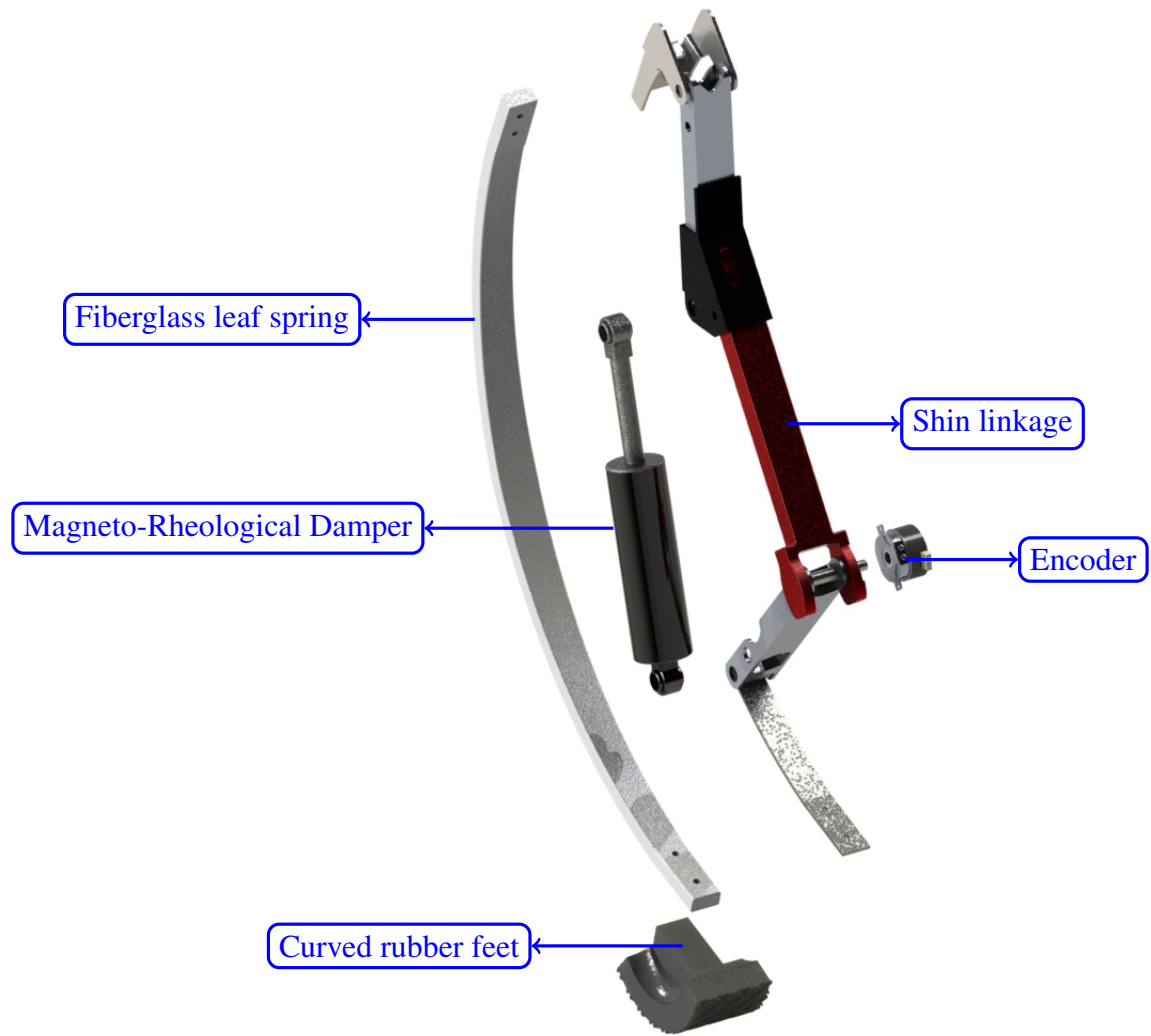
3D CAD exploded view of HIL shin leg section
